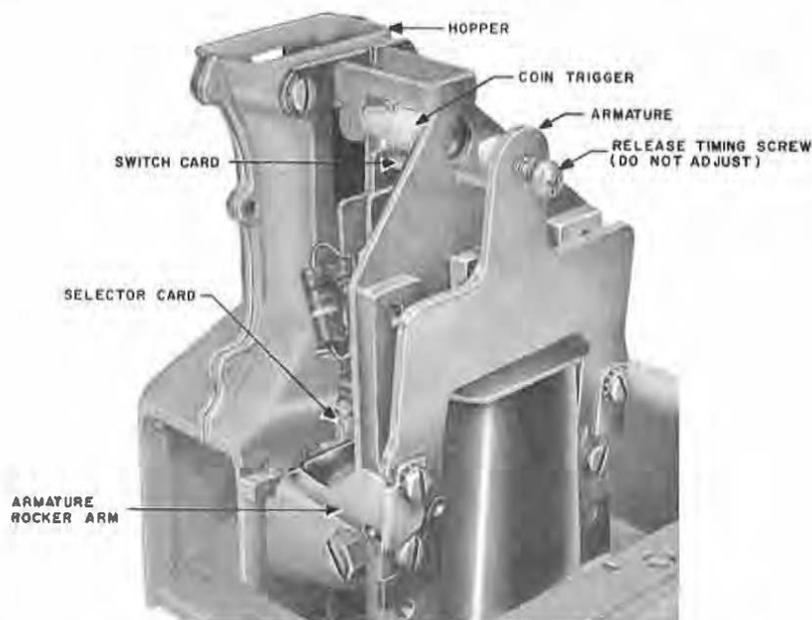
P-10E683 Mechanism Unit with P-13E961 Coin Relay
